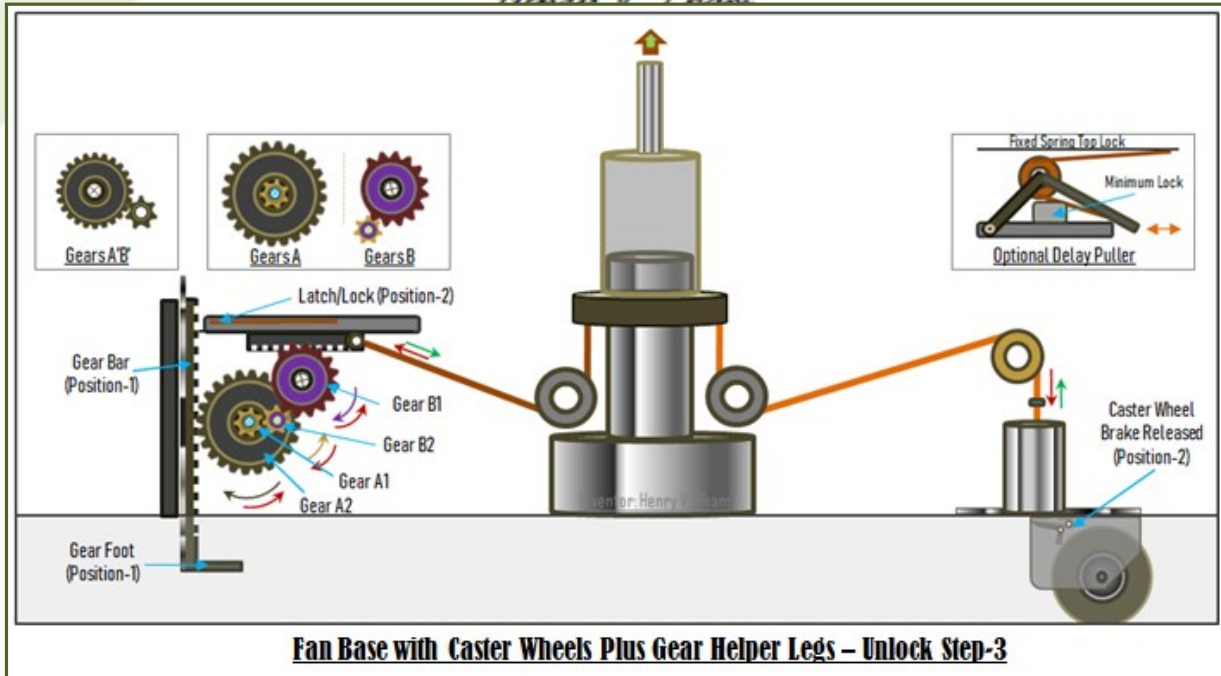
360° Stand G-Rotator Fan - Caster Wheels & Gear Helper Legs Lock/Unlock Step-3
